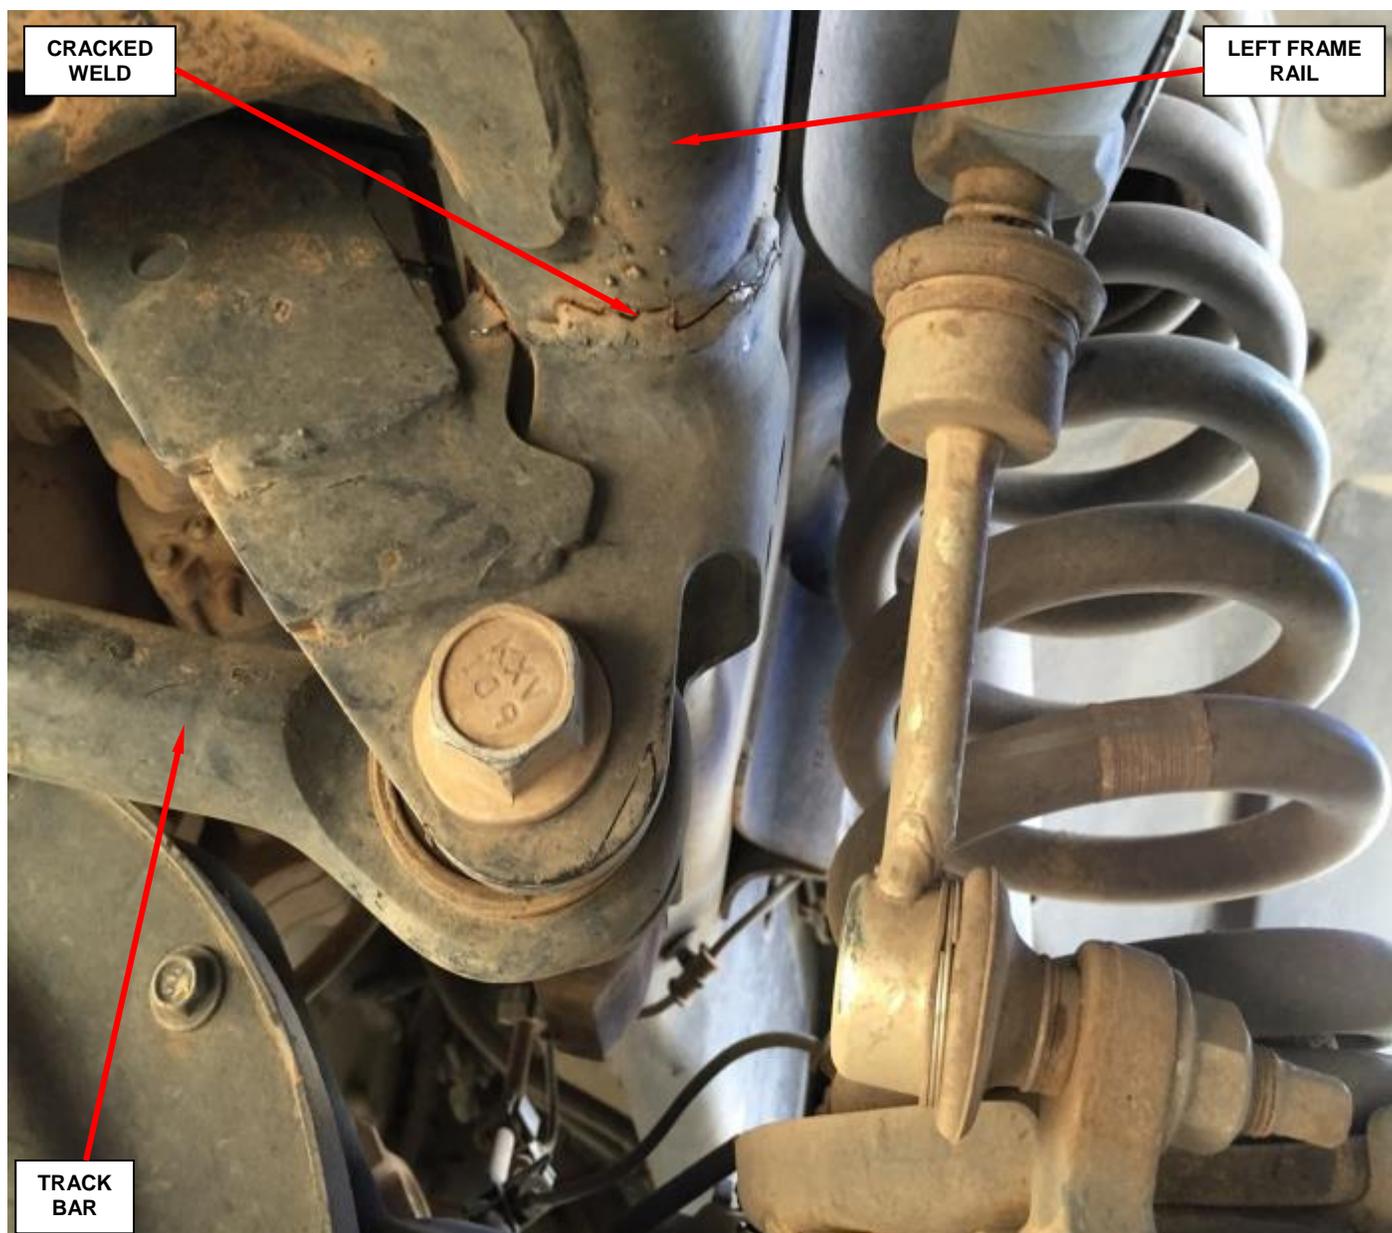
Example of a Cracked Track Bar Bracket Weld
